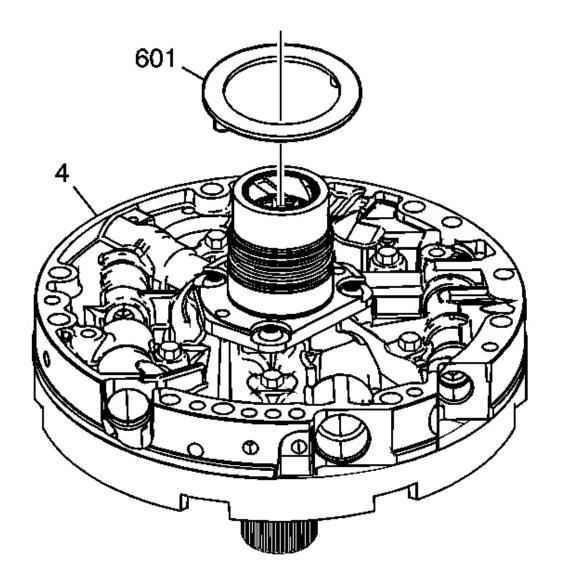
View Of Thrust (Pump To Drum) Washer Courtesy of GENERAL MOTORS CORP.
